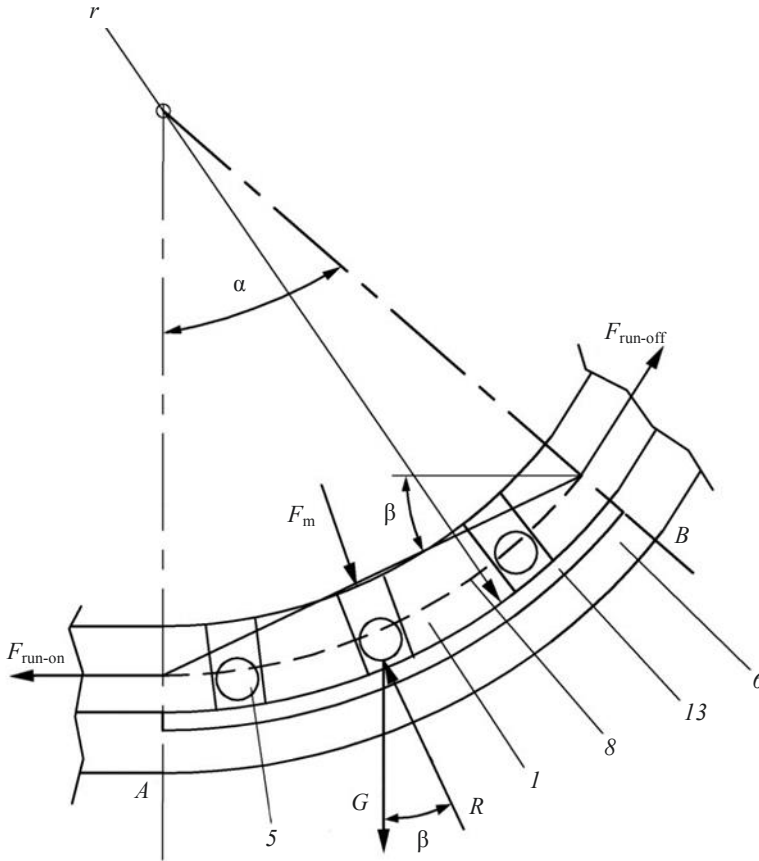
Design scheme of the conveyor transition section (detailed view I of Figure 1)
